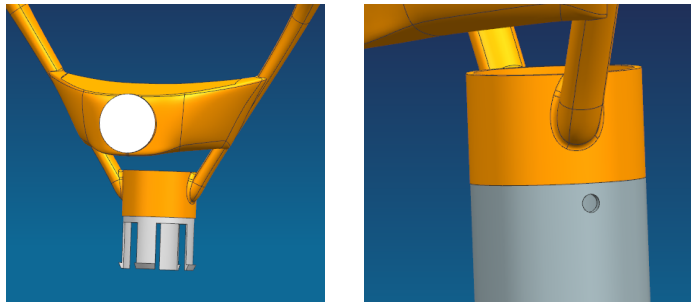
from the left - a) locking mechanism - b) screw mechanism
